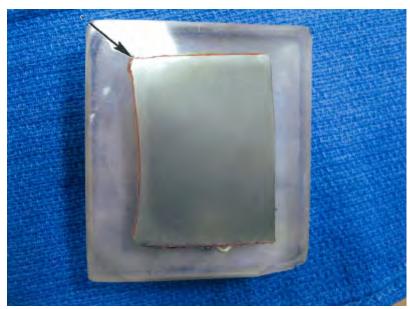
Microsection made below fracture surface. Arrow points to fracture initiation location.
